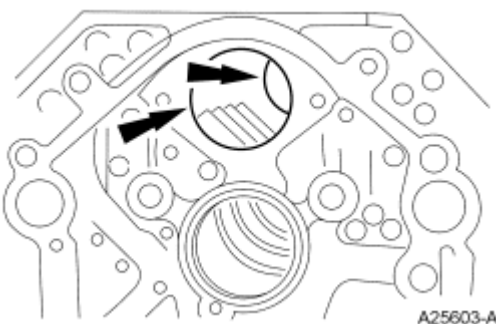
Identifying Engine Dynamic Balance Shaft Bearings
